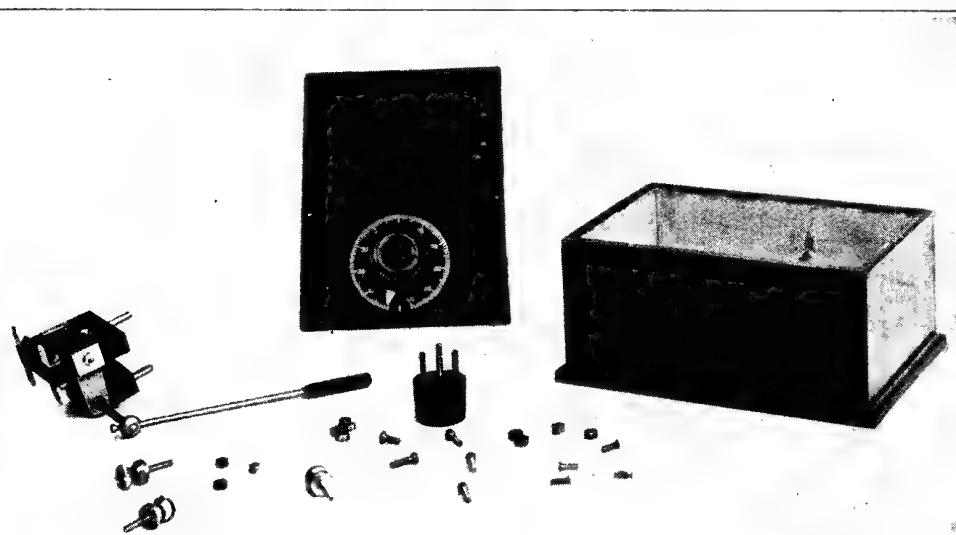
Collected together are the parts used in the construction of the local oscillator. The condenser is not shown disassembled, but the turning knob and dial can be seen on the panel
